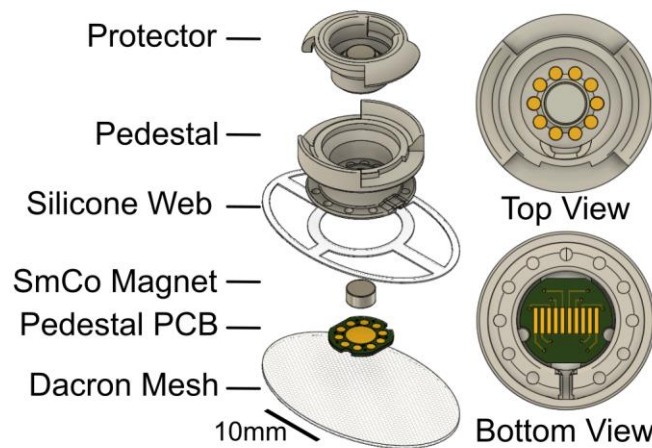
Diagram of the chronic percutaneous pedestal assembly. Magnified top view showing contact discs of the pedestal PCB and bottom view of contact pads that implanted electrodes terminate to.
